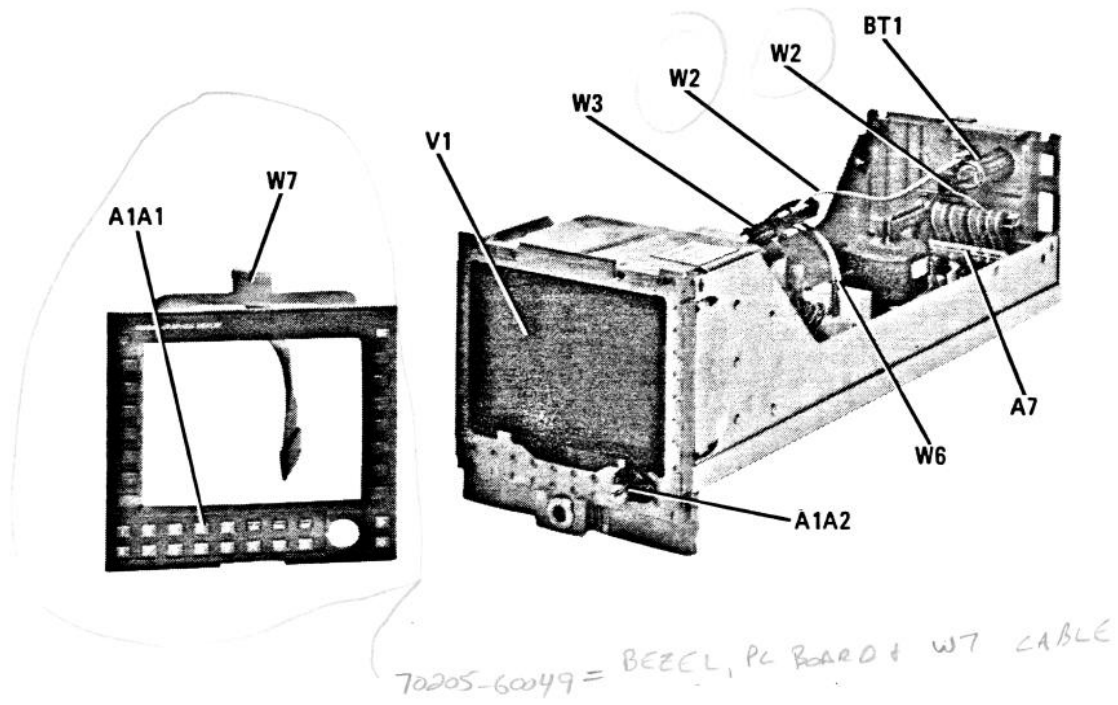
HP 70205A Major Assembly and Cable Locations (2 of 2)
